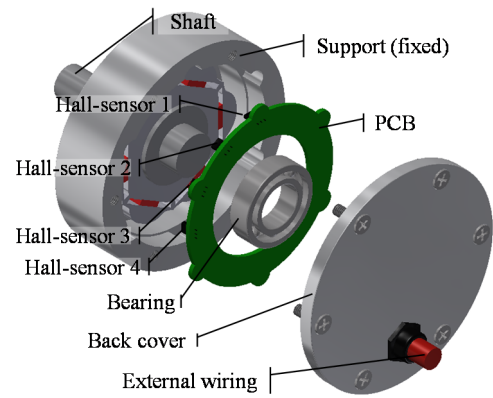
Disassemble view of the Shaft-type magnetic resolver
